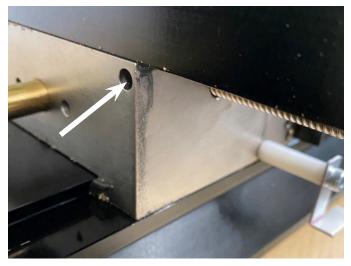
The arrow is pointing to the X-axis gib set screw access hole on the mill and chucker lathe saddles.
